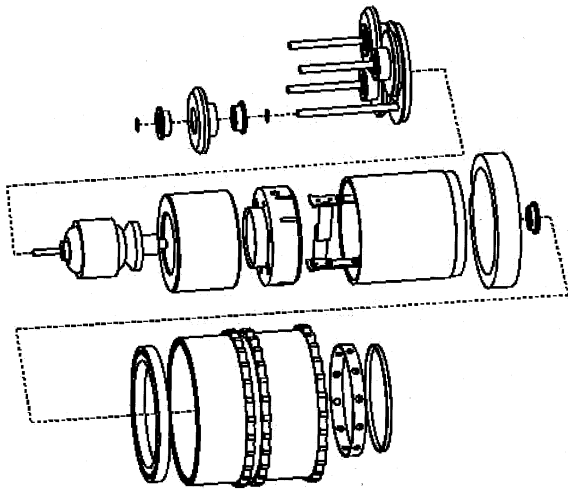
Assembly diagram of the planetary-traction drive mechanism, showing the rollers, bearings and shafts (top row), motor/brush assembly (middle), and drive sprocket with encoder ring and ball bearings (bottom).
